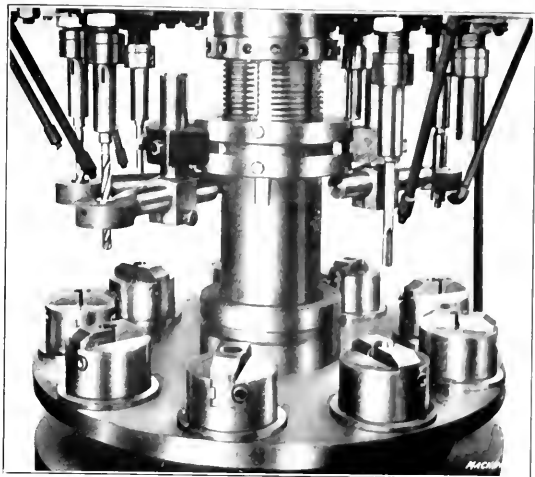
Close View of Work Table and Bushing Holders shown in Fig. 3
